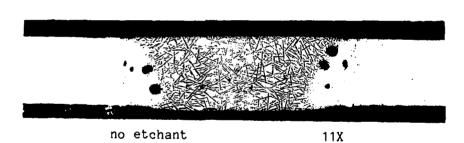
Autogeneous weld made with preweld heat treatment at 750 F for 10 hours in vacuum, AC
